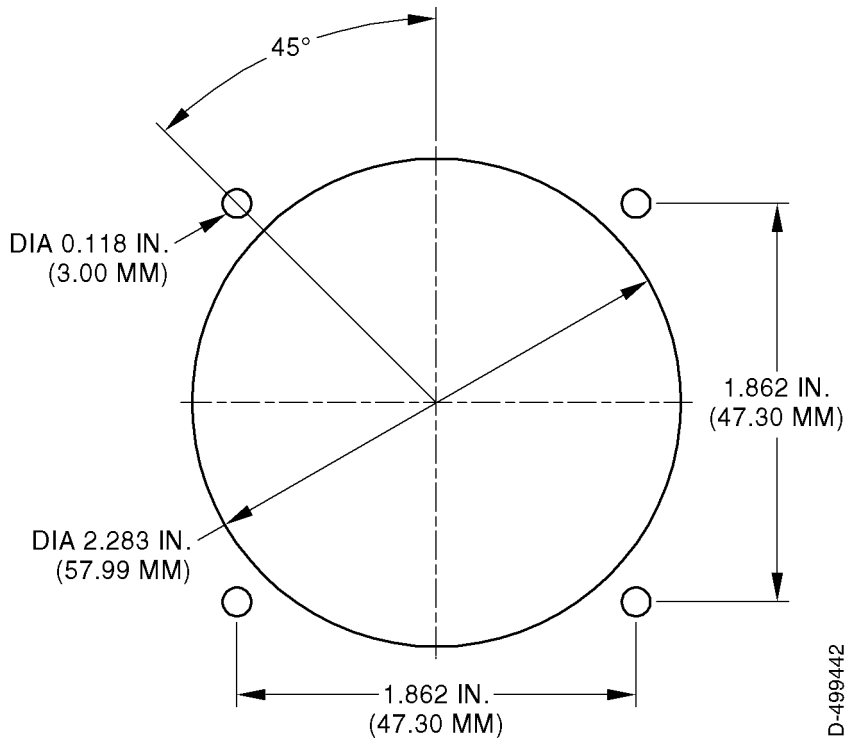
(Sheet 1 of 1) KGX Control Panel Standard Mounting Hole Cut-Out Option
